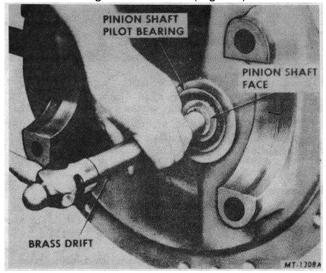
Starting Pinion and Cage Assembly from Carrier
